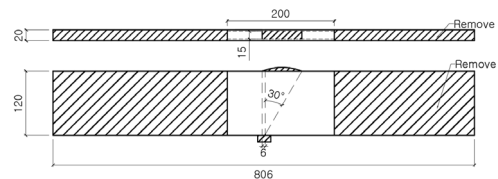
Weld zone hardness and macroscopic piece
